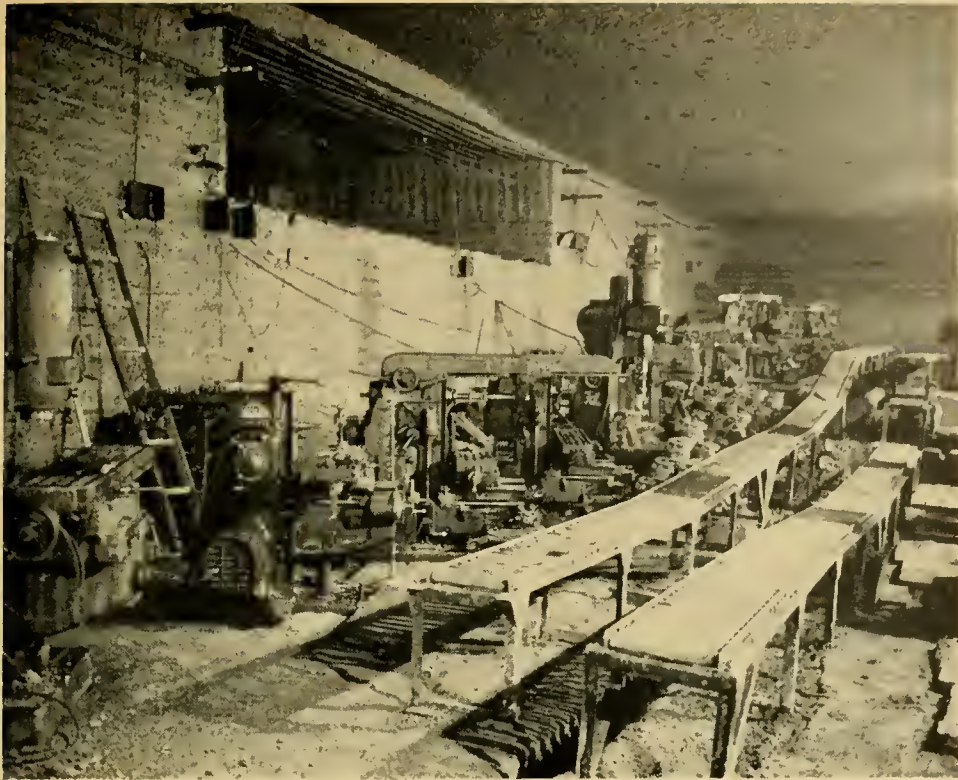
Cylinder head shop, Tomura plant at Oya Works.
